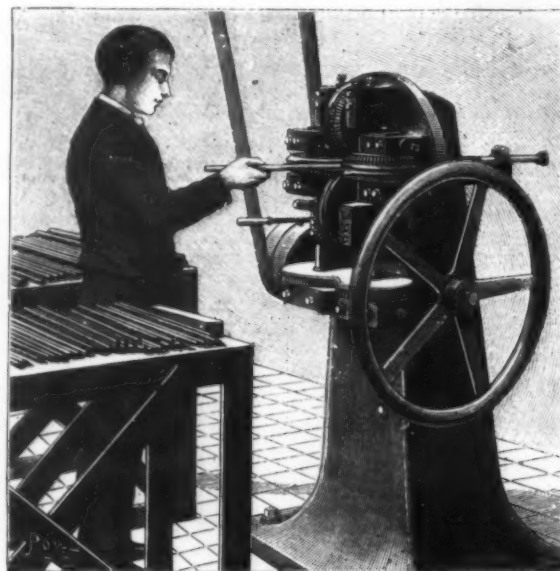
MACHINE USED FOR THE MANUFACTURE OF THE STEERING PARTS.
